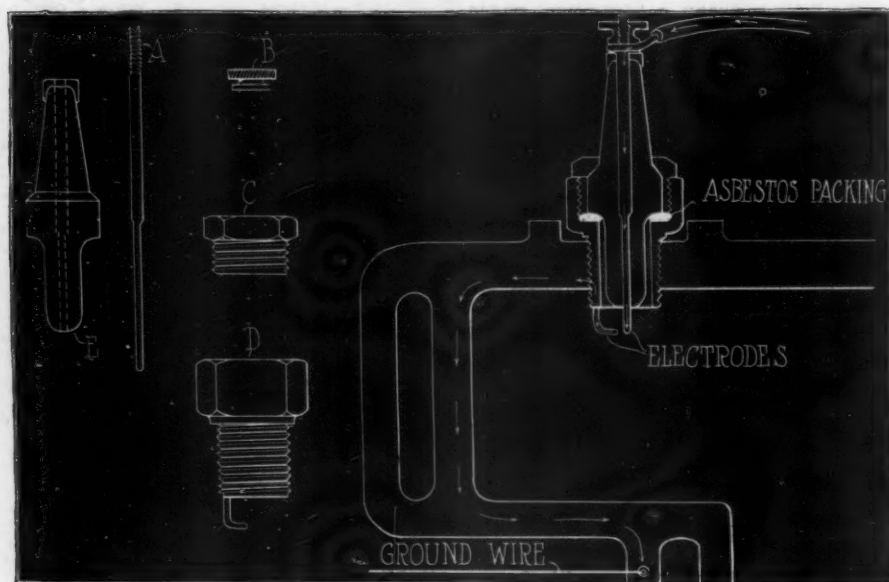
PRINCIPAL PARTS OF ORDINARY SPARK PLUG. THE PATH OF THE HIGH-TENSION CURRENT THROUGH THE PLUG SHOWN BY ARROWS
